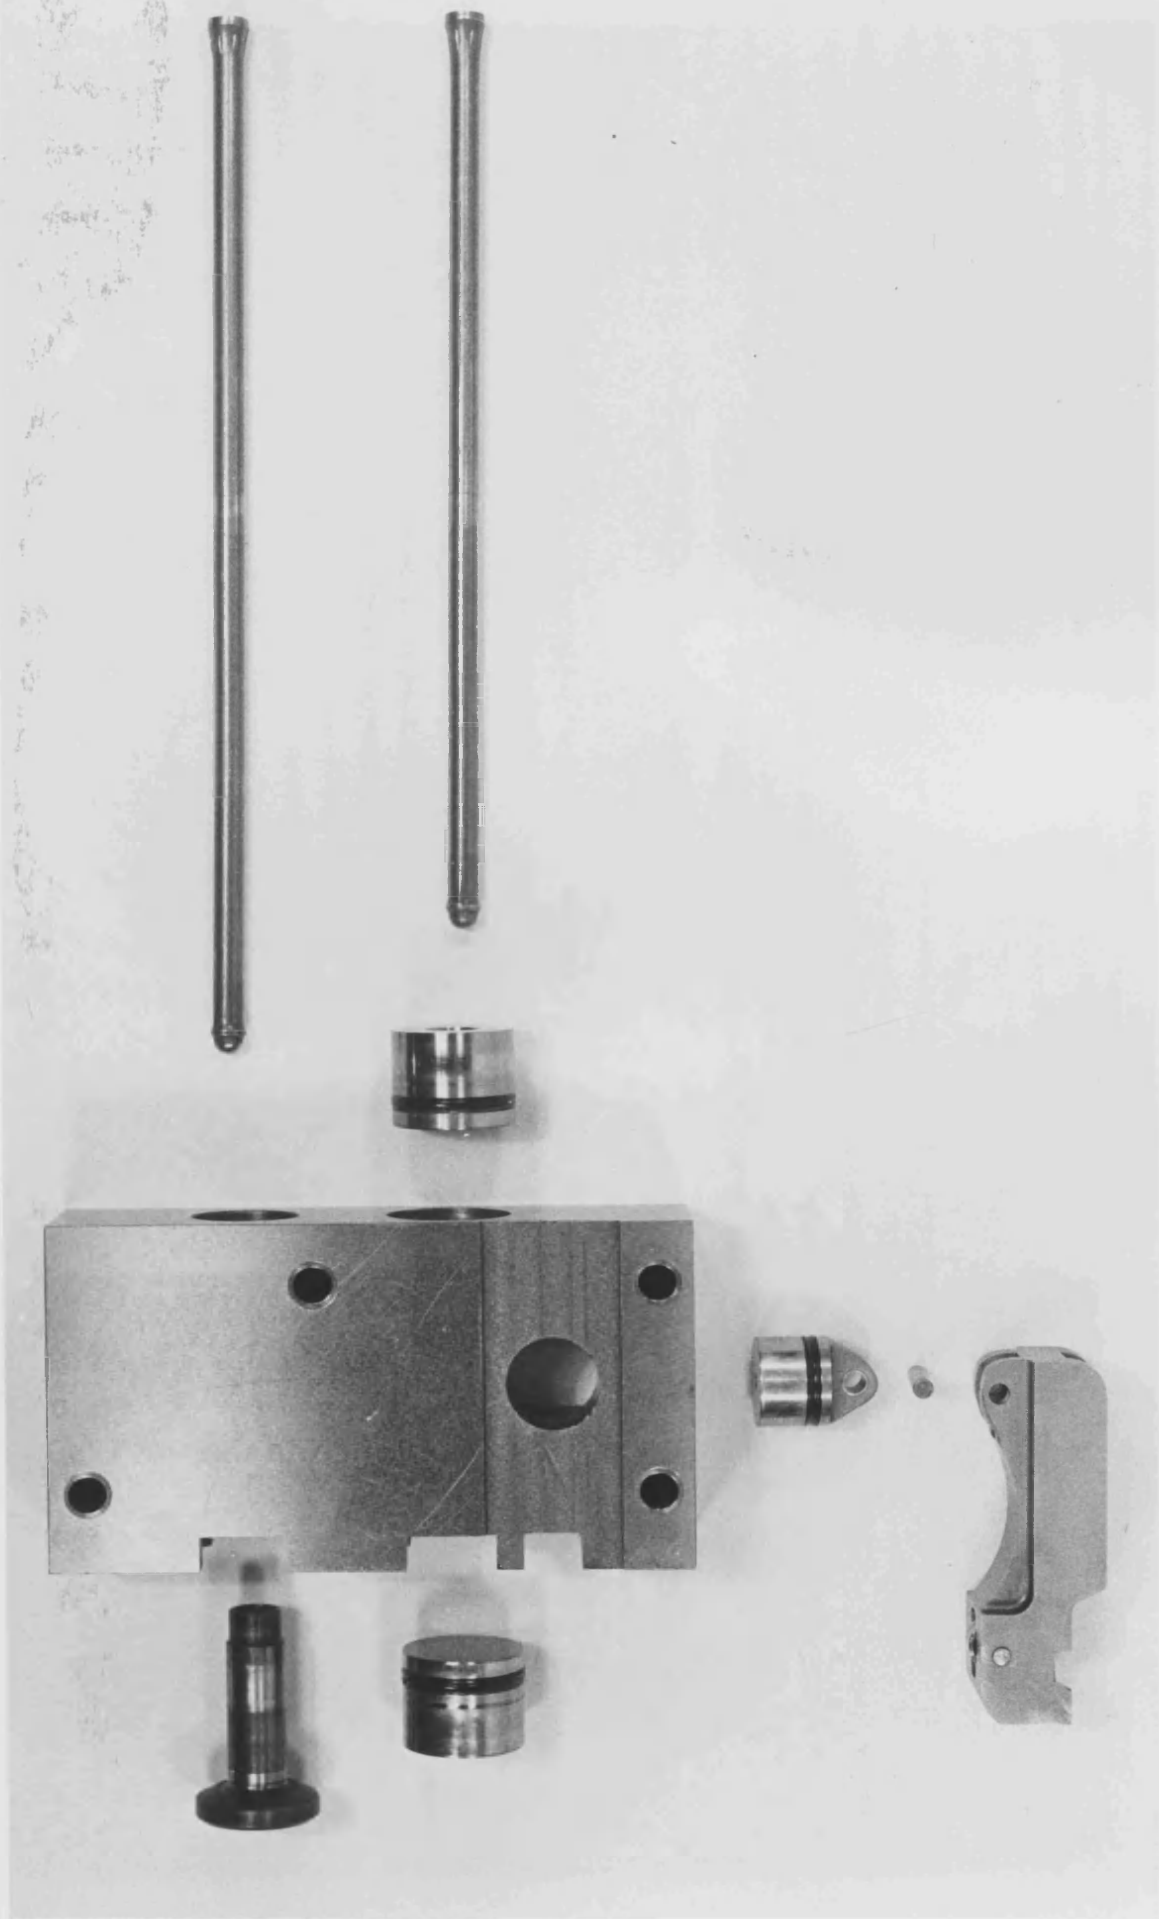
Exploded view of the mechanism with cast iron hydraulic chamber.
